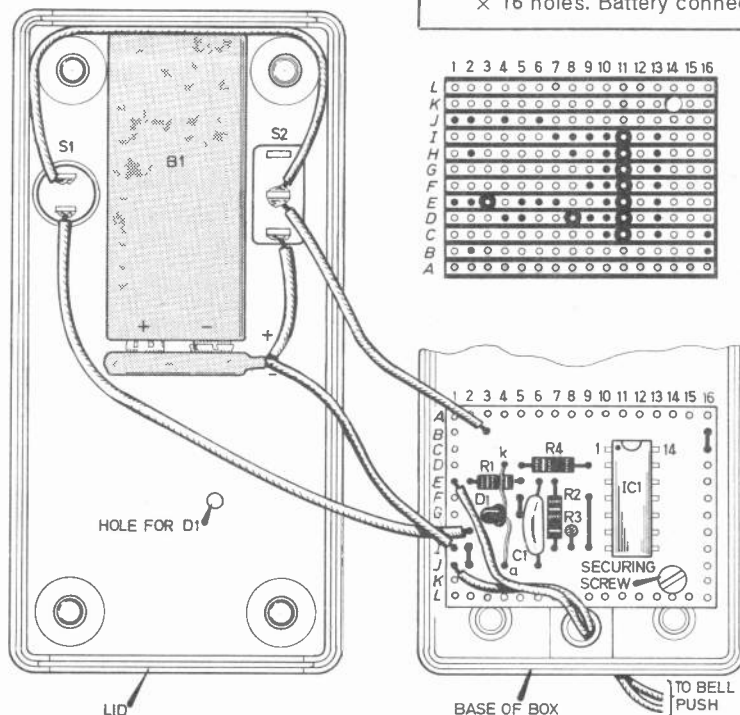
Interior view of box showing assembly of parts and wiring between lid and base of box. Top right: underside view of stripboard.
